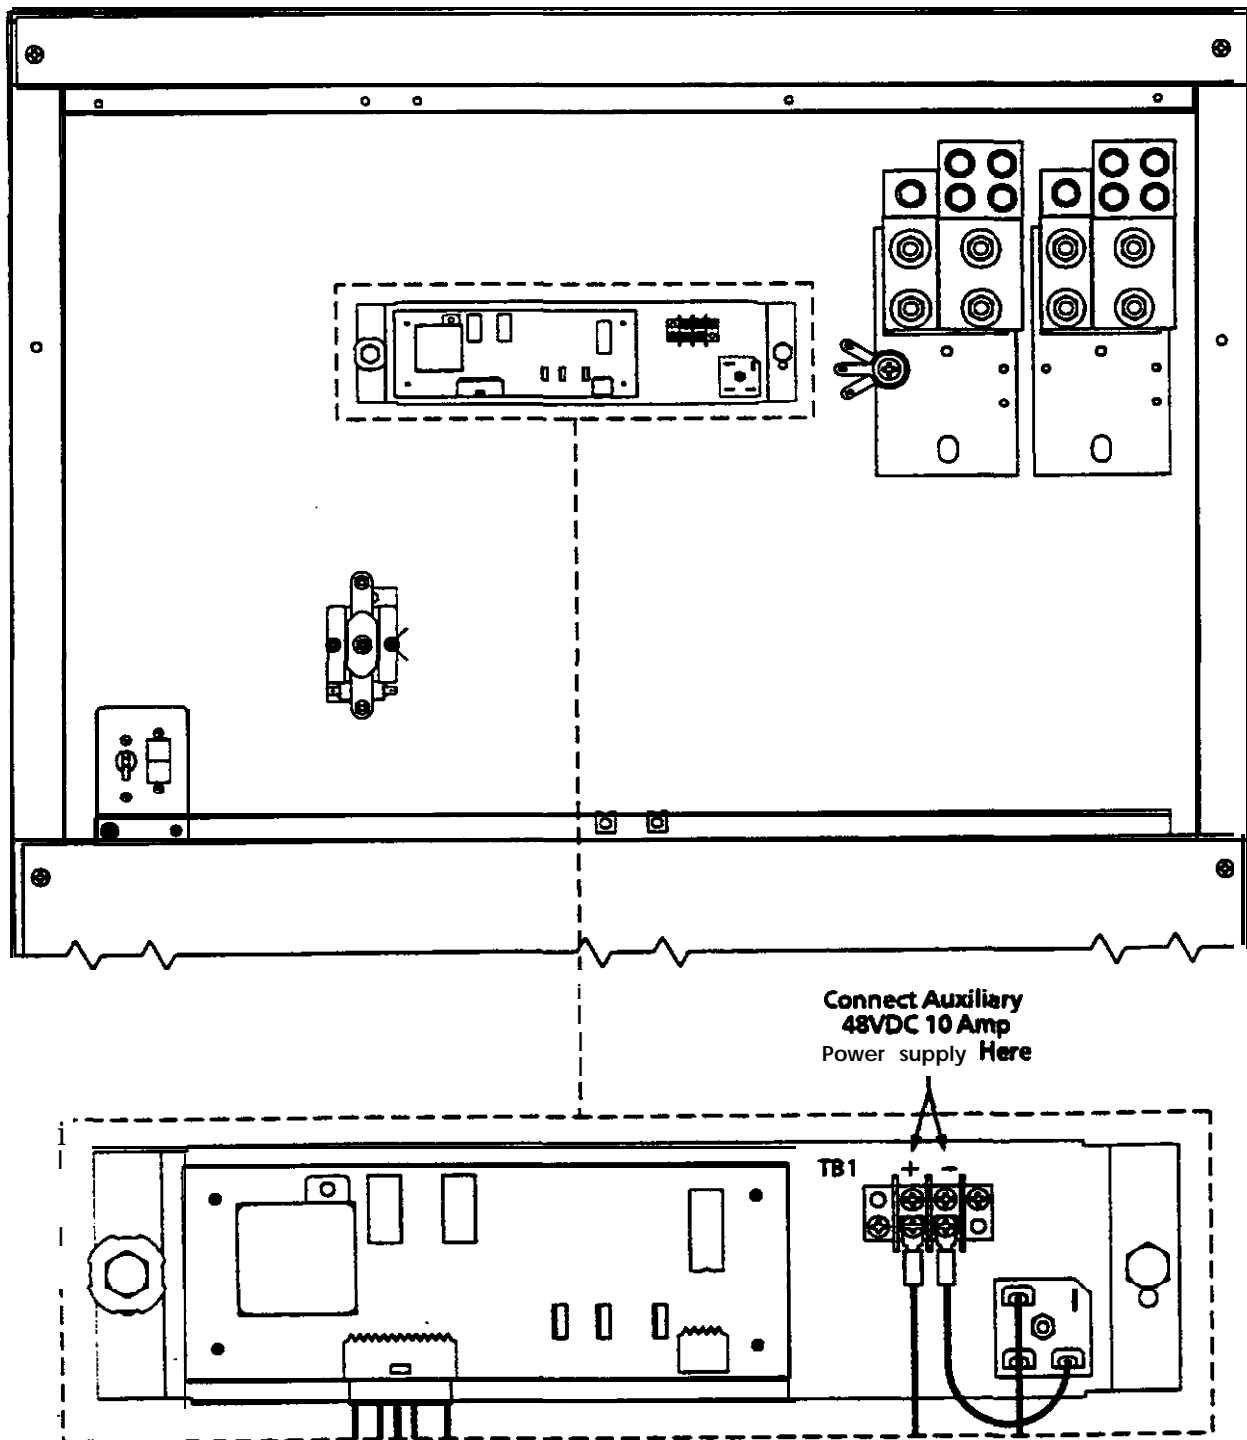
Front Partial View of Rectifier Interior Rear Panel Showing Location of Auxiliary Power Supply Connections (Detail Removed for Clarity)
